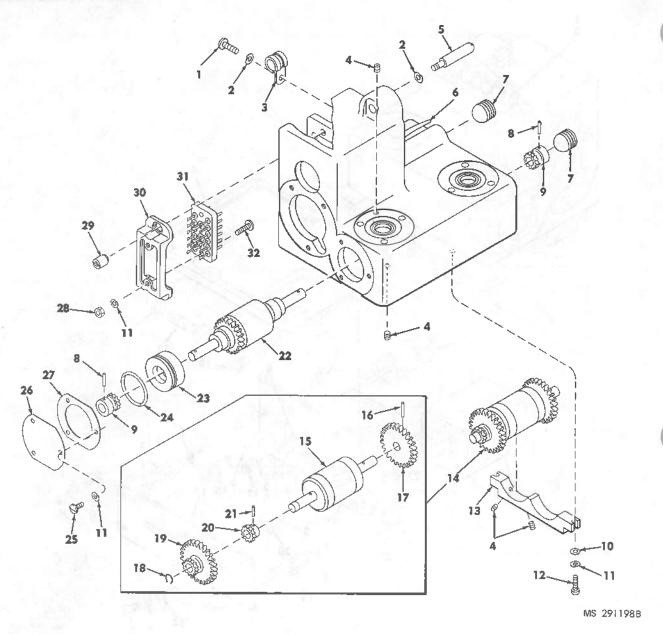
SUPPORT: DUPLEXER /8515127/-EXPLODED VIEW /SEE FIGURE 144 FOR NEXT HIGHER ASSEMBLY/
